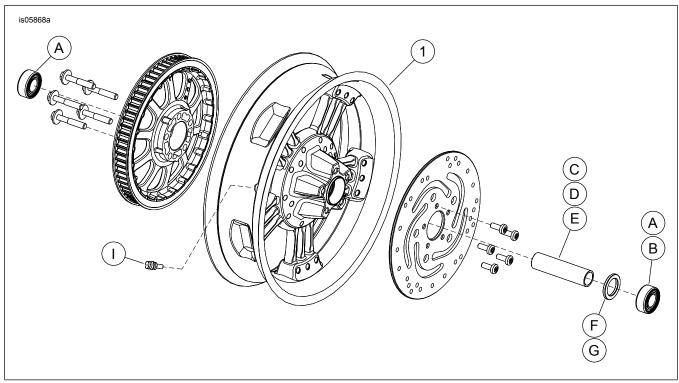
Service Parts: Rear Magnum 5 Wheel (17-inch shown)
